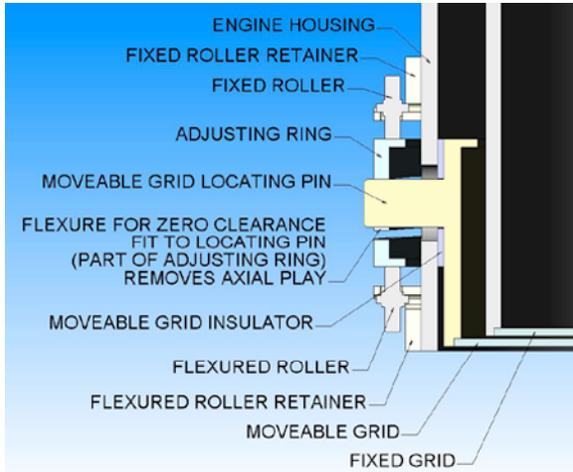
Grid movement mechanism using the rotation of a ring with azimuthal slots to displace a pin supported grid (center) axially.
